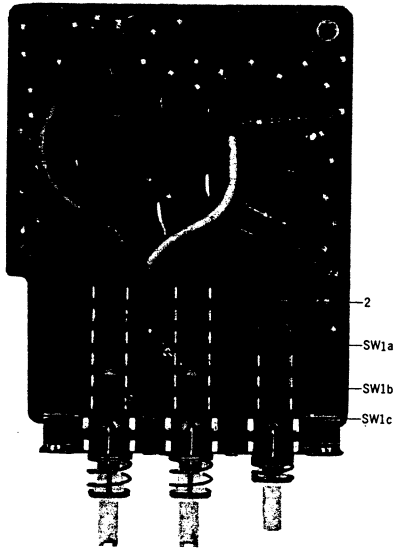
PHOTO OF METER P.C. BOARD (98-5003)
